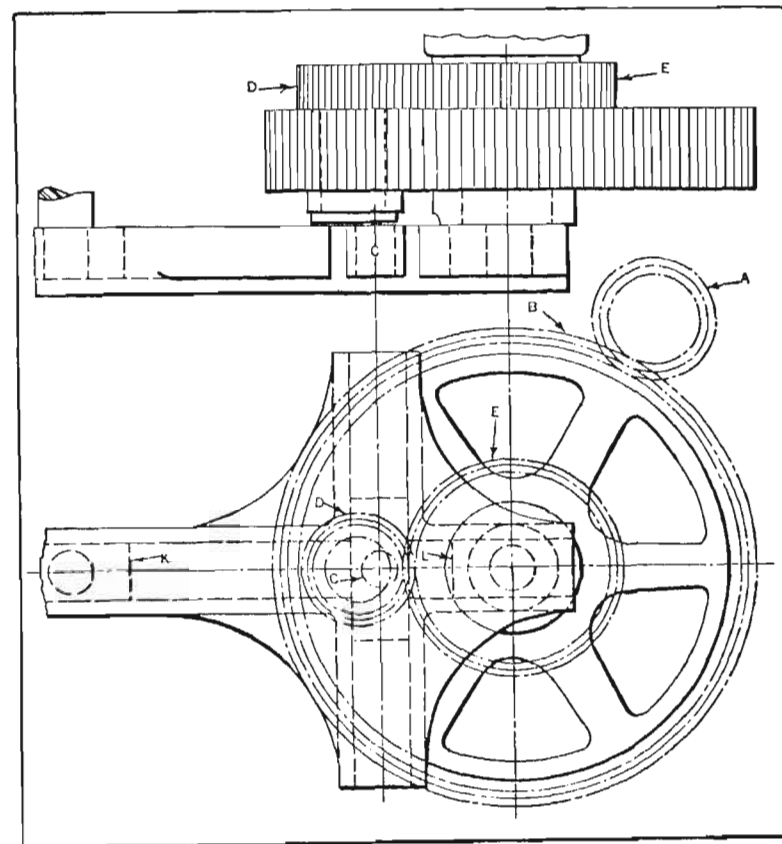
Scotch Yoke Having an Eccentric Planetary Crankpin which Provides Dwell at Each End of Stroke
